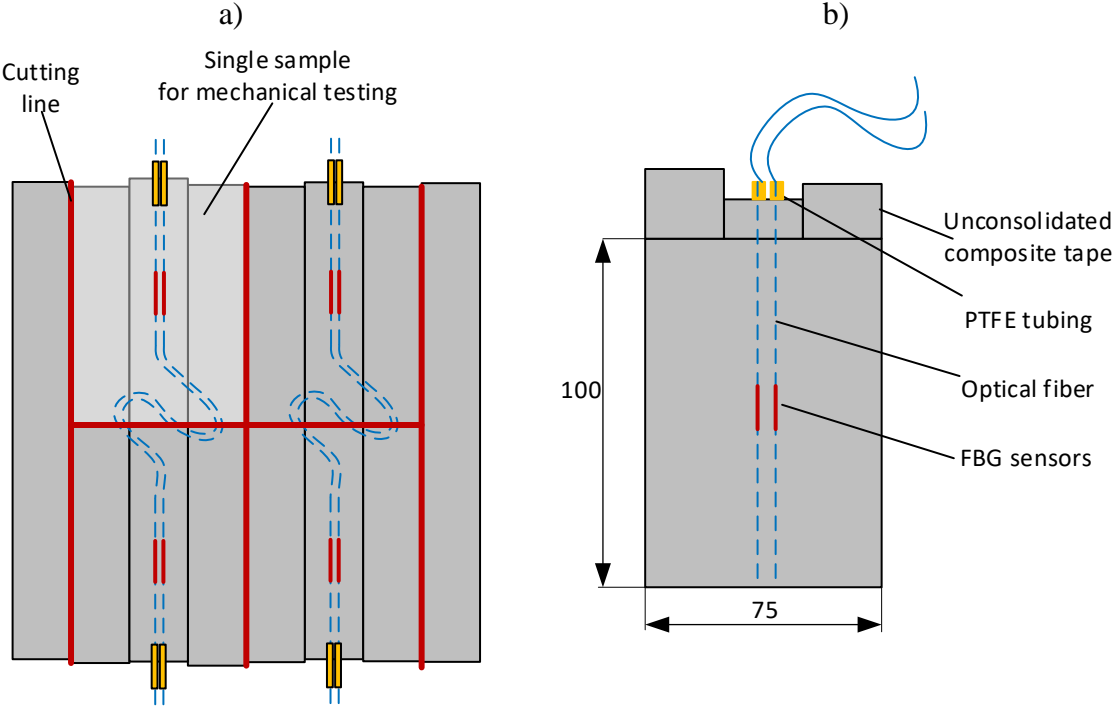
Samples used for mechanical testing cut from the manufactured plate, a) Cutting scheme; b) A single sample.
